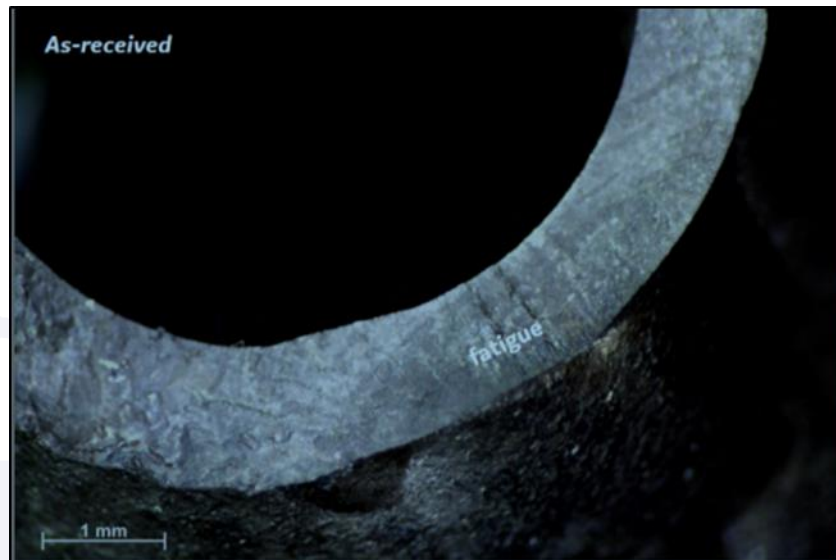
Metallographic analysis image showing cracks and “beach marks”, typical characteristics of the material-failure mechanism due to fatigue.
